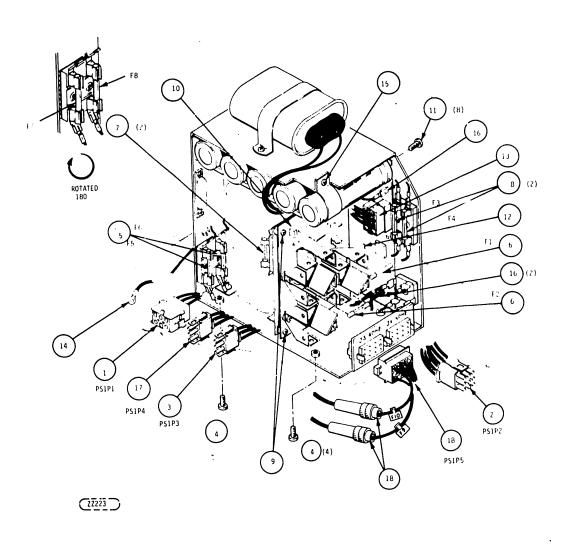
A. 50/60 HZ POWER SUPPLY ASSEMBLY
